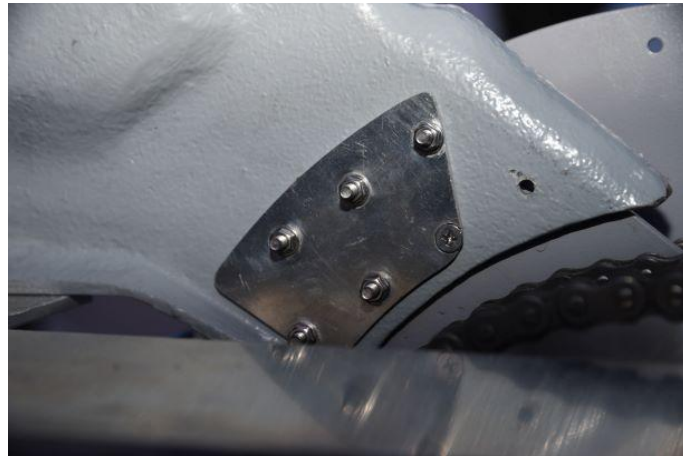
How screws and aluminium washer are attached on shutter #1 - view from the inside
